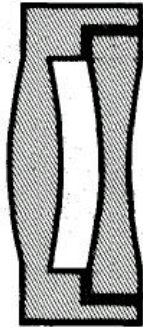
This optical doublet has an integral flange that provides proper airspace and centering. The assembly can be snapped, glued, ultrasonically welded or heat-staked, depending on size, required tolerance and available tooling.
